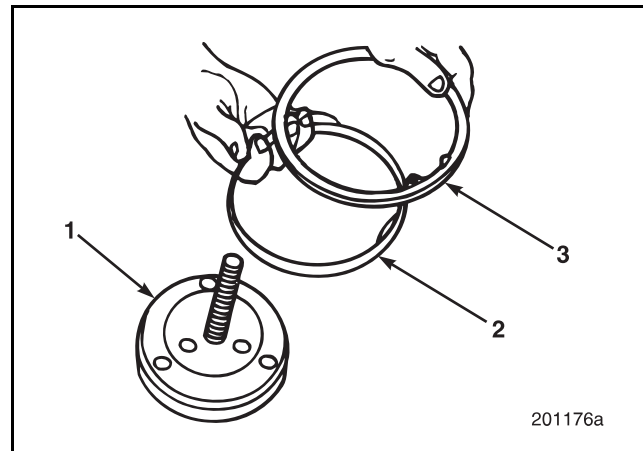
Crankshaft Rear Oil Seal Installation
